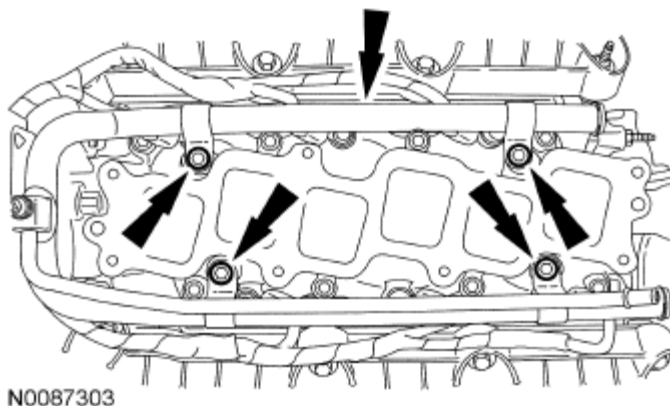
Locating Fuel Rail And Injectors Assembly Bolts
